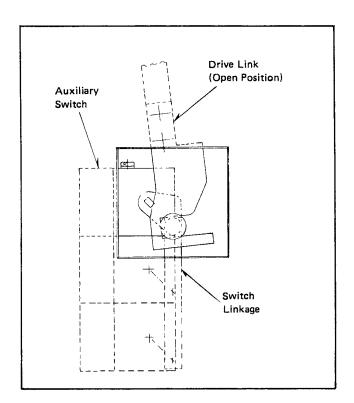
Auxiliary Switch Drive Link Engagement: CMD Network Protectors
